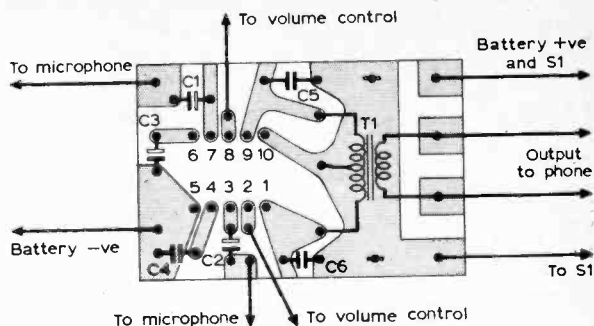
The printed circuit pattern of the copper laminate board used in the prototype. Actual board size 1 x 1/4 in.
